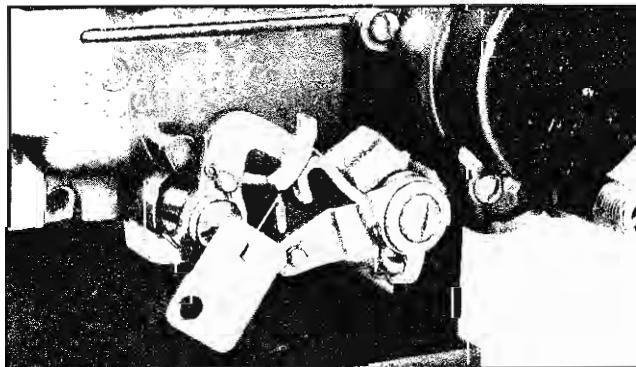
B-125 Checking Secondary Throttle Lever Adjustment
